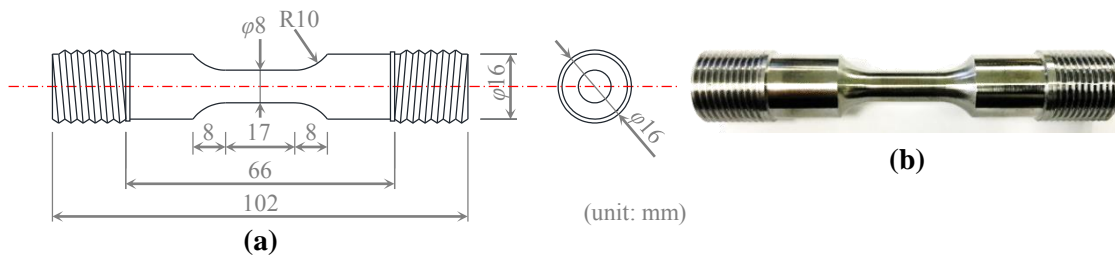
(a) Geometry the round test specimens of SA440 steel and (b) photo of specimen
